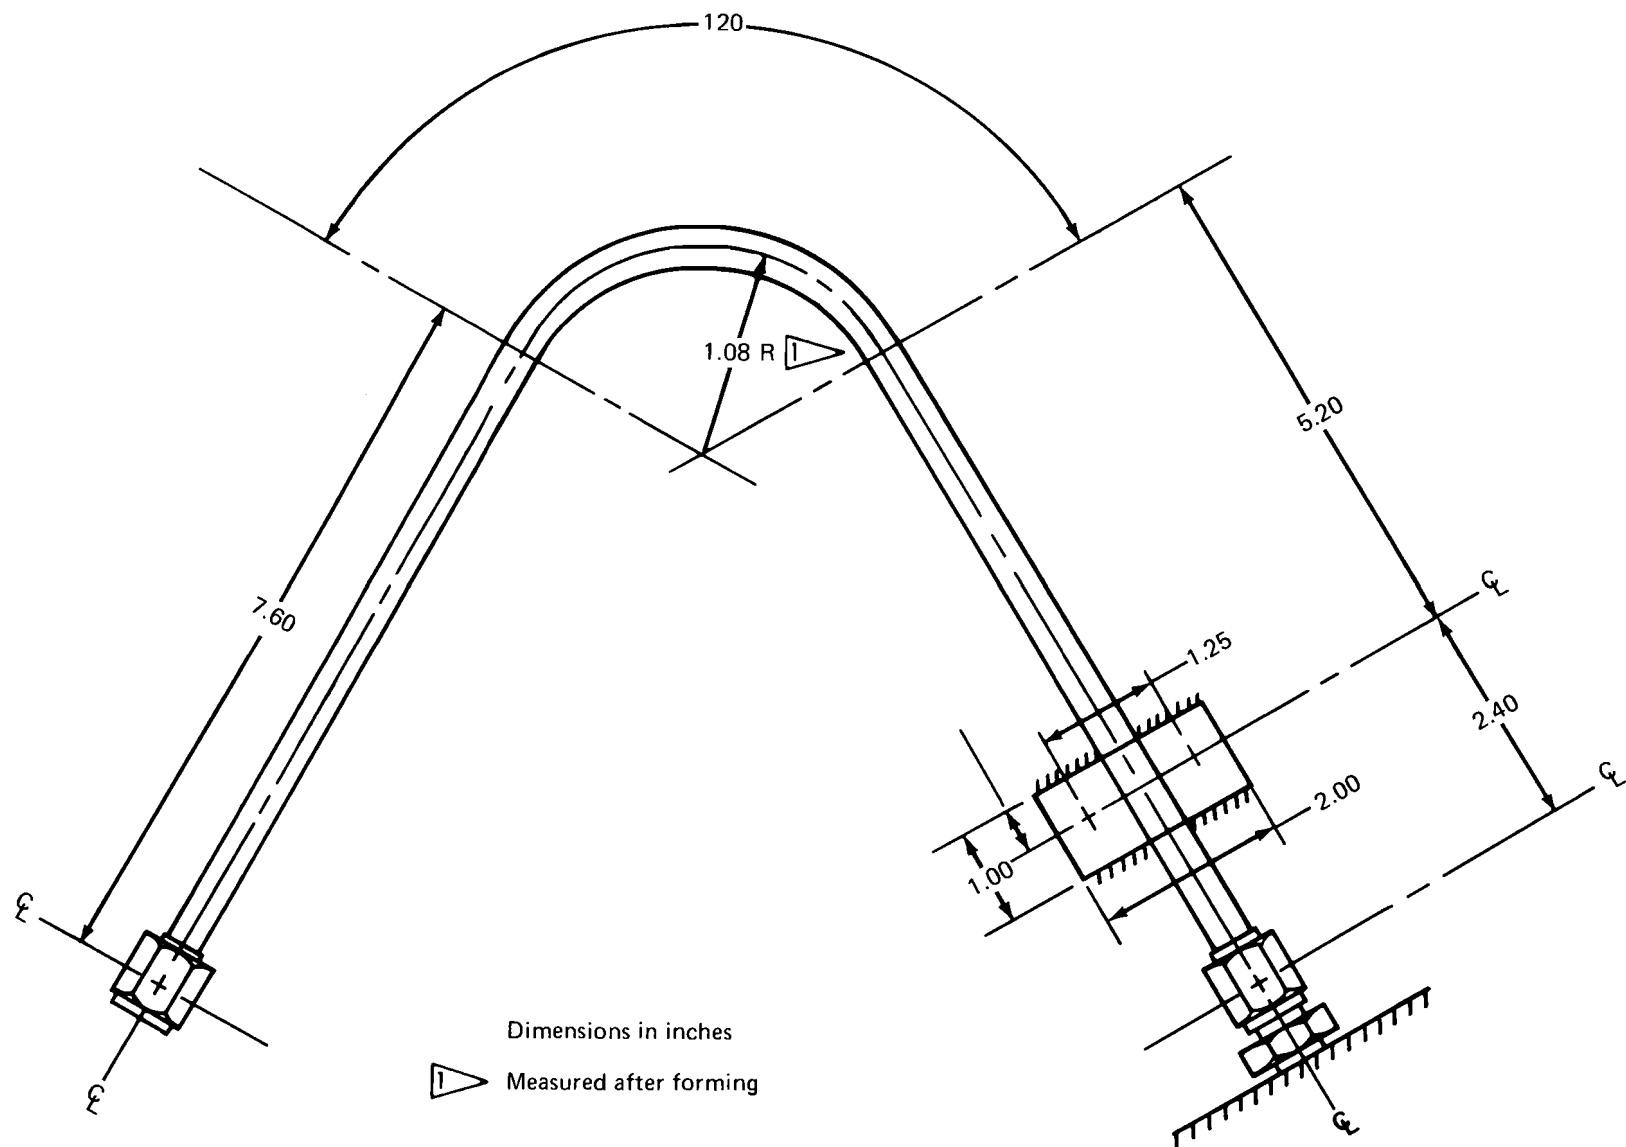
DIMENSIONS FOR 3/8-IN. BENT TUBE SPECIMEN
